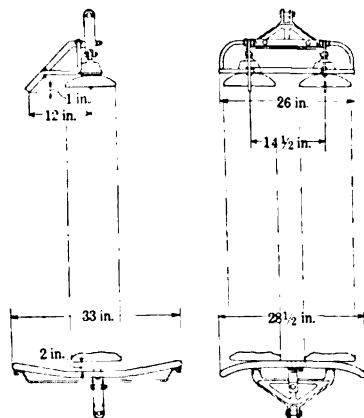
ARCING RING AND HORN ASSEMBLY (1926 INSTALLATION) FOR DEAD END STRING PHILO-CANTON LINE
